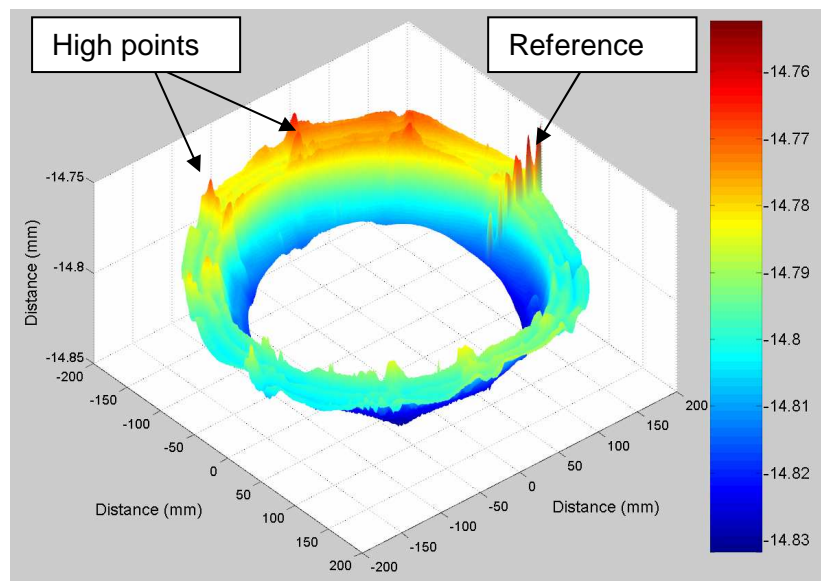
CMM surface scan of the brake disc showing high and low points.
